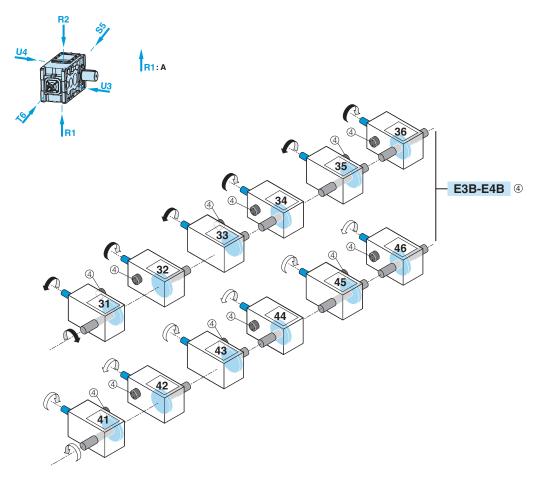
Shaft layouts and directions of rotation for bevel helical gear units
